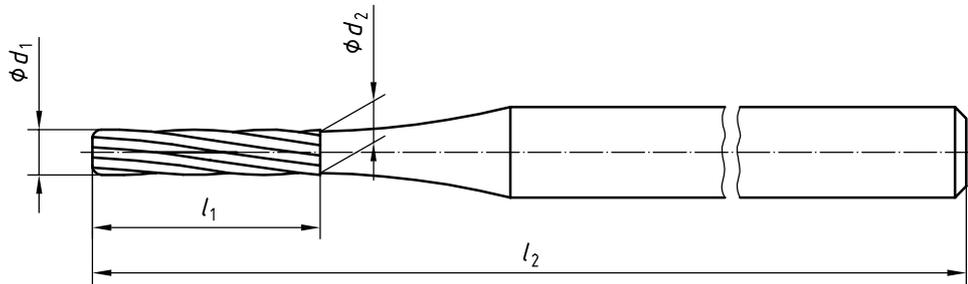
Cylindrical, rounded edge, head length 6 mm, carbide finishing burs
